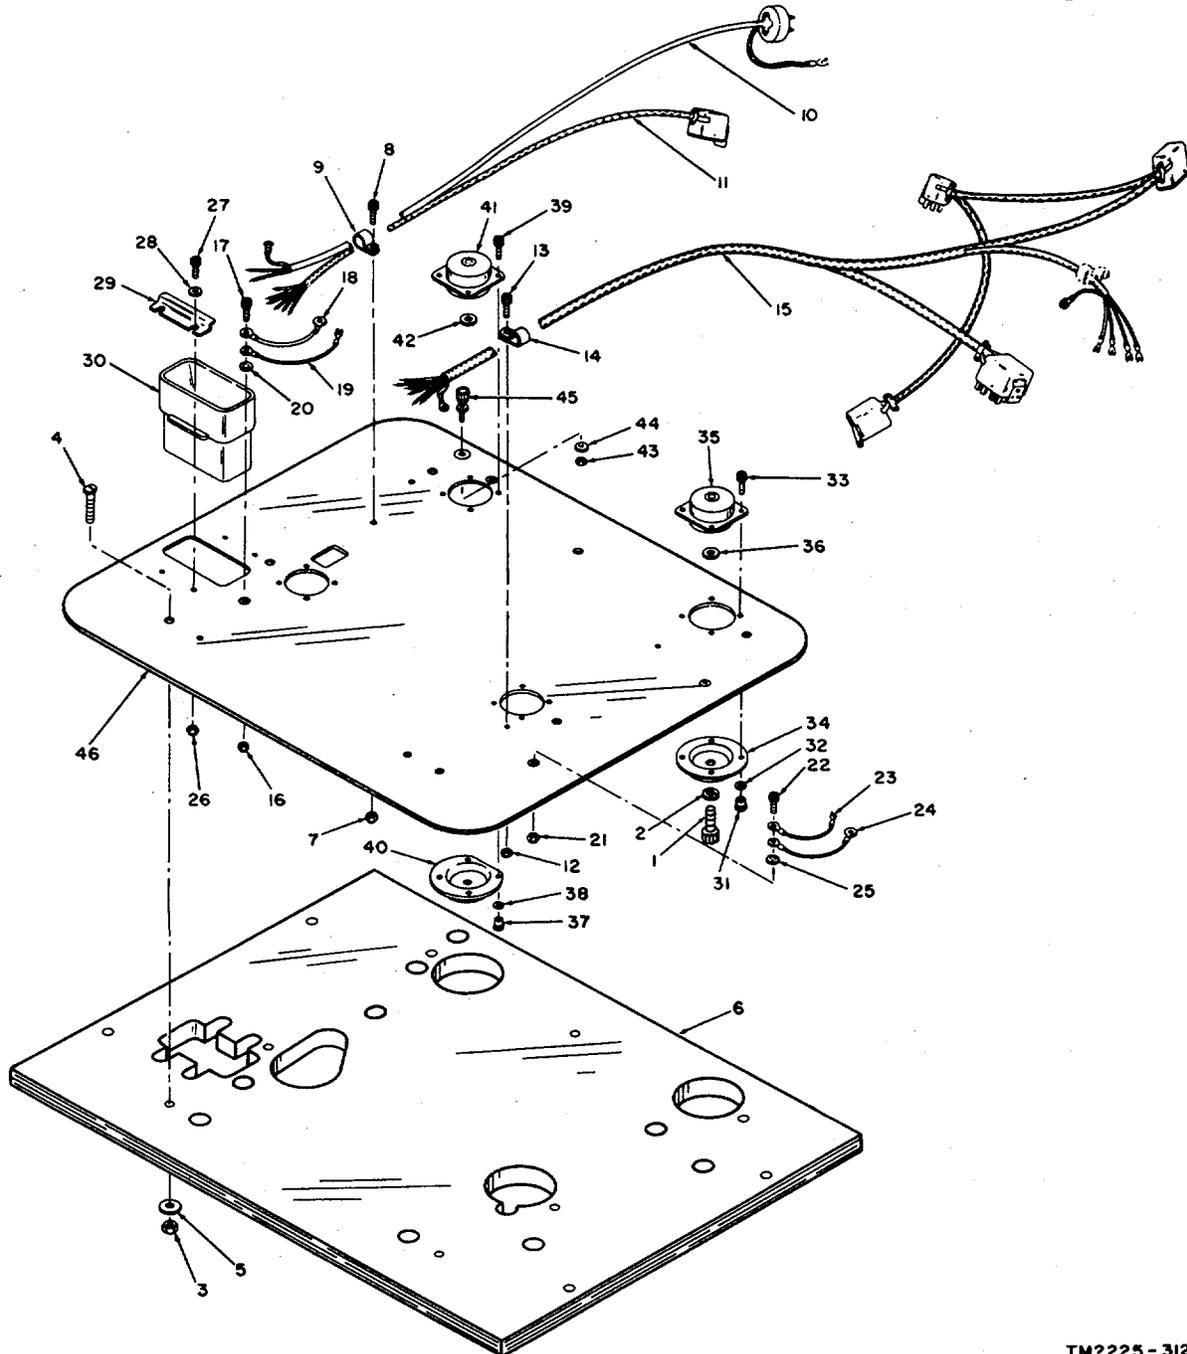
Reperforator-transmitter base components, exploded view (TT-76/GGC).
